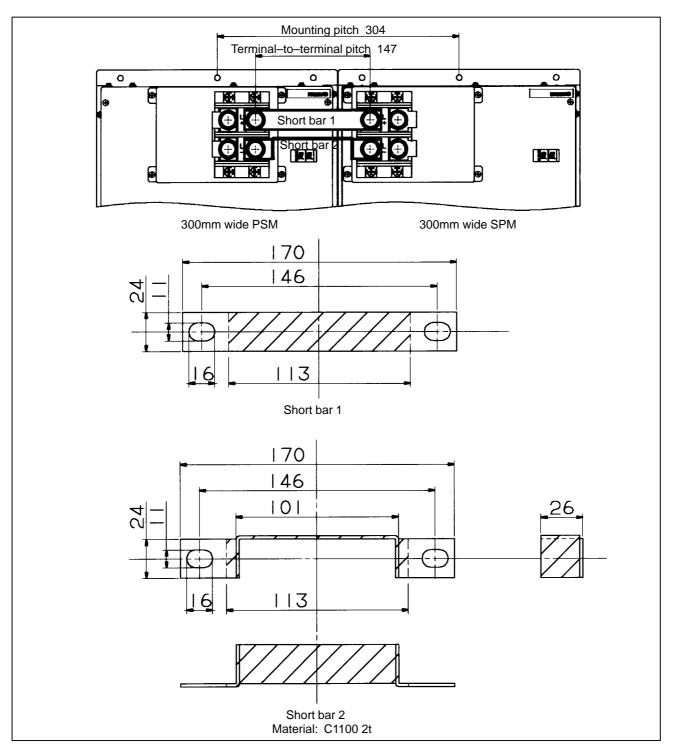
(a) Short Bar Outline Drawing (for Use Between a 300–mm–Wide PSM and SPM) Ordering information: A06B–6078–K823
